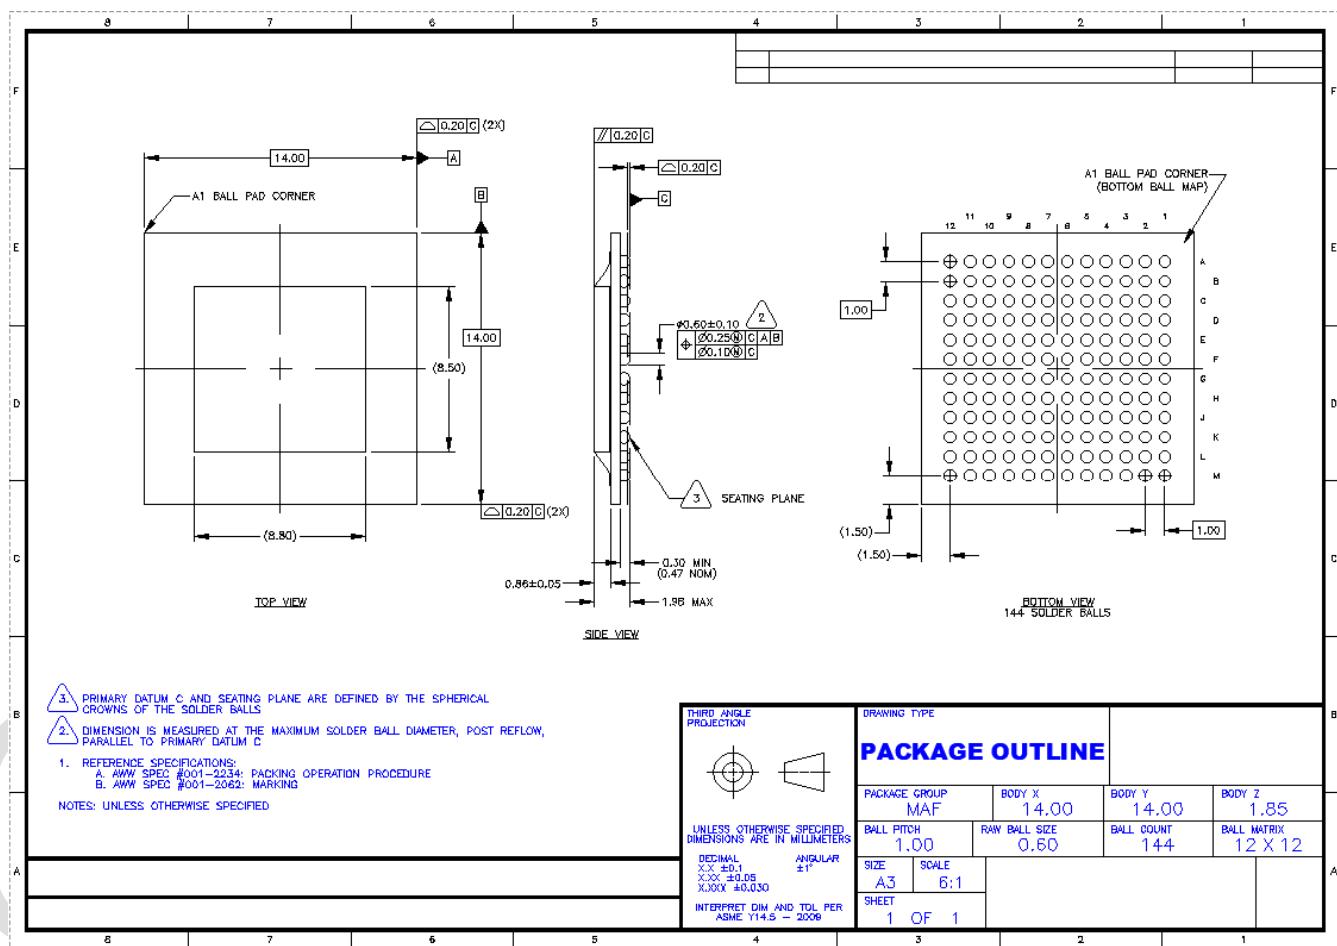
PACKAGE OUTLINE DRAWING FCCSP
